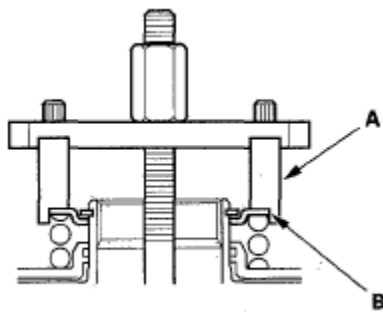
Identifying Clutch Spring Compressor Attachment And Spring Retainer
